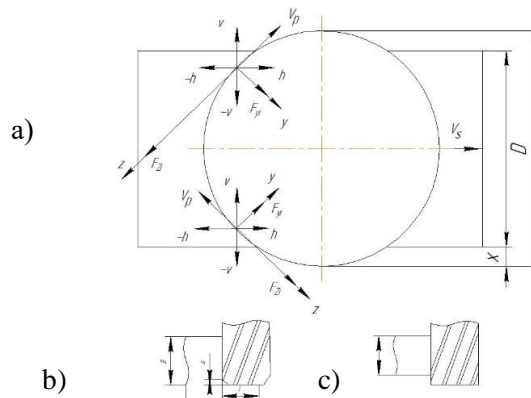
Milling types and schemes mouening for tool instrument and of the part mutually location change scheme.
